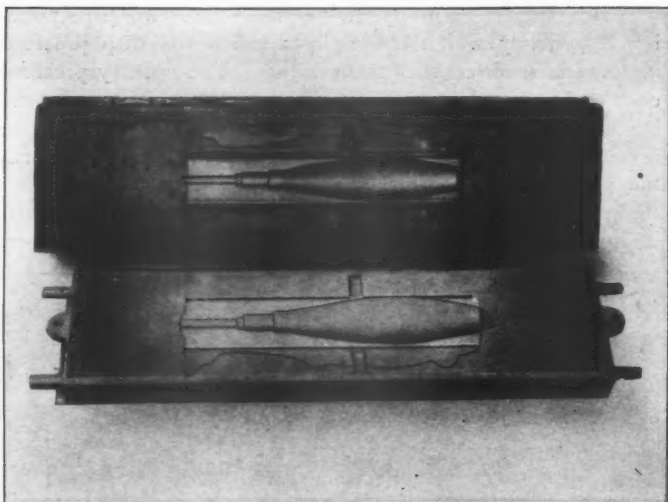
IRON WORKING PATTERN FOR INSIDE HALF OF CORE BOX AND FINISHED HALF OF MOLD
